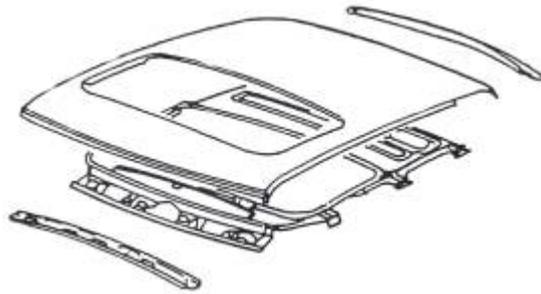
Body Side Assemblies, Roof, BC-Post, Front and Rear Doors
